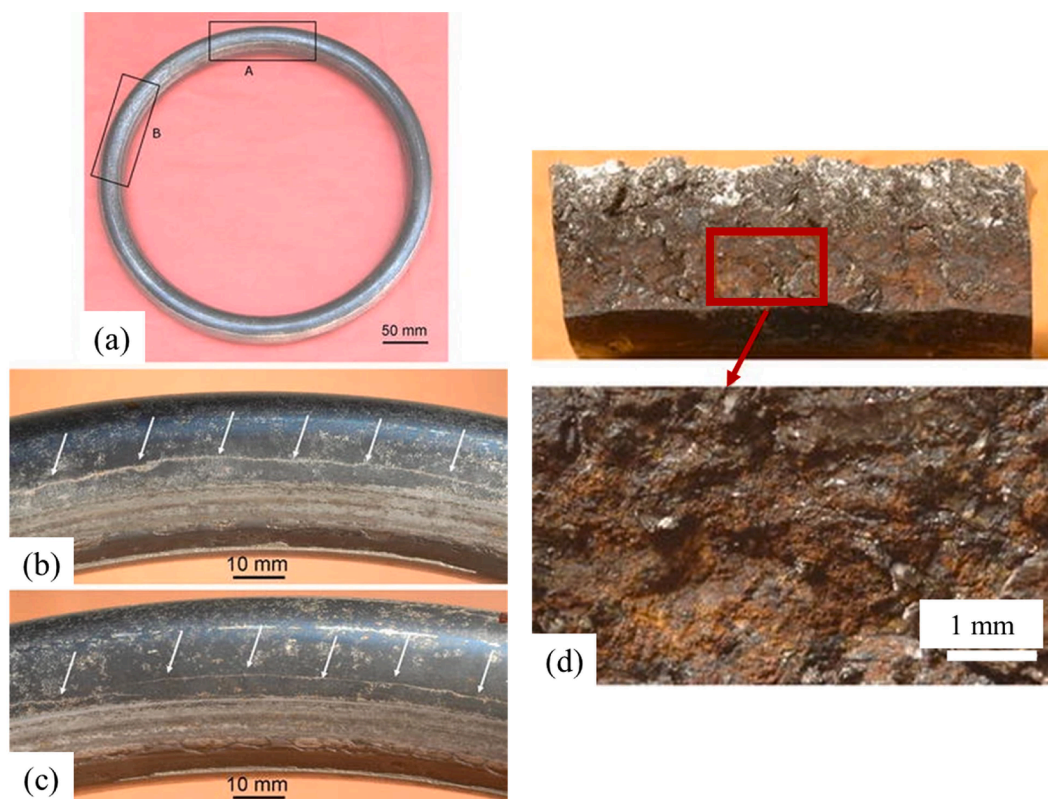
Ring gasket: (a) overall view of the failed gasket; (b) and (c) close-up views of regions A and B, which reveal cracks; (d) fracture surface of the ring gasket displaying a thick layer of oxides and/or corrosion products¹⁰ (adapted from Gore et al., 2014).
